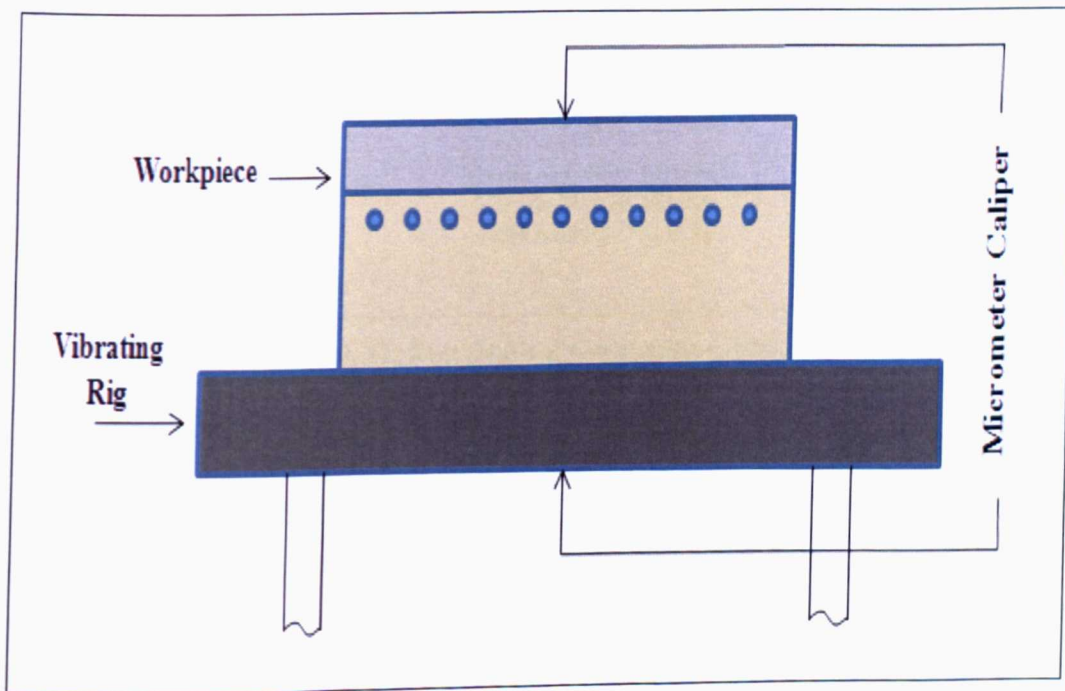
11: Measurement of Real Depth of Cut Using a Micrometer Caliper.
